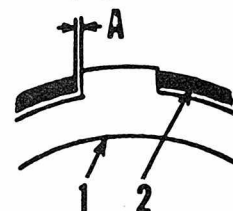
Clearance (A) between clutch boss (1) and friction disc (2) should be 0.002-0.012 inch.
